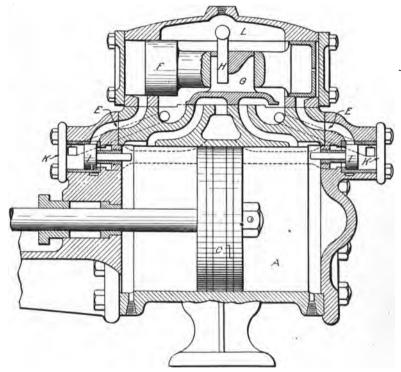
Section of Pump Cylinder Showing Valve Operated with Tappet
